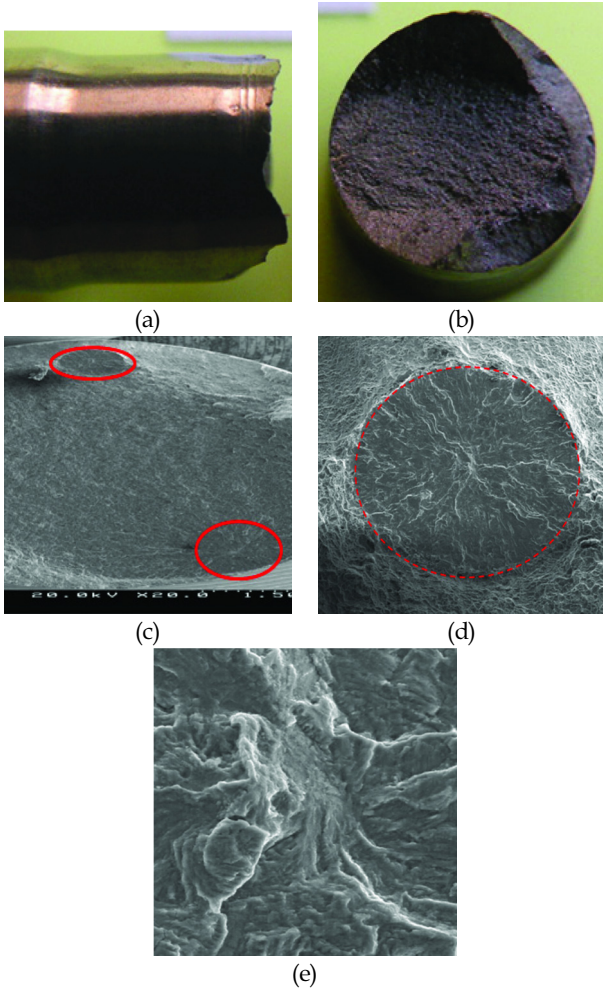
(a); Closeup view of fractured UNSM-treated specimen, (b); front view of Fig. 5 (a), (c); SEM photo of Fig. 5 (b) showing two fish eye cracks (S, L), (d); magnified view of S-crack, (e); initiation site of S-crack: facet type
